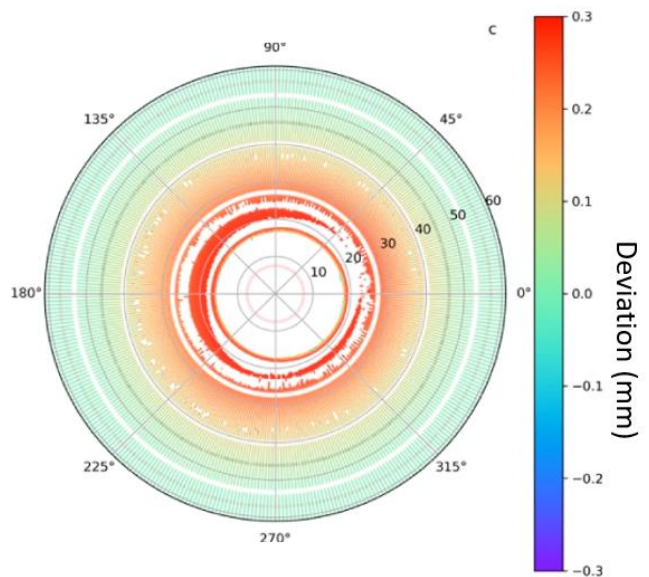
Shape deviation between inner clamping and disassembly steps in machining step 2 (Face B)
